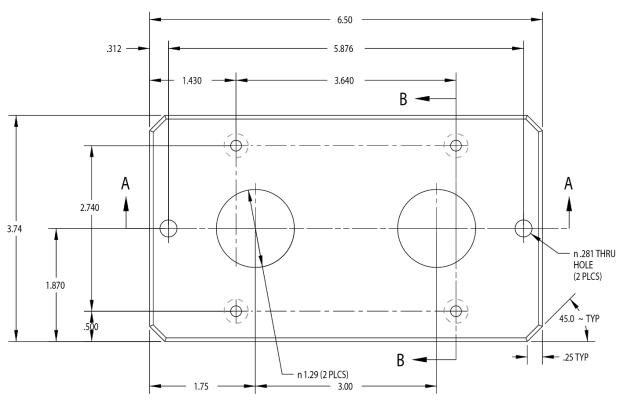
BACK MOUNTING PLATE DIMENSIONAL DRAWING
